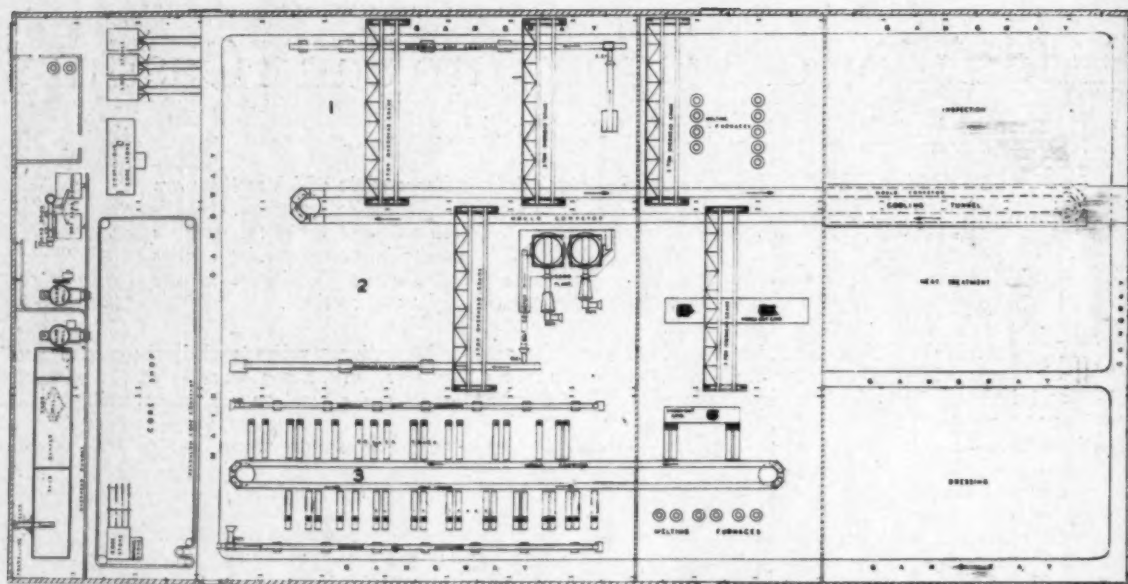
Drawing of a modern mechanised magnesium foundry.
